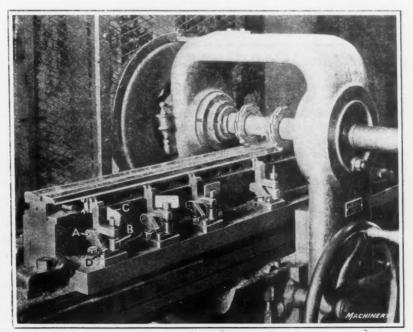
Milling V-shaped Ball Races along Edges of Two Bed Rails held on Opposite Sides of Fixture
